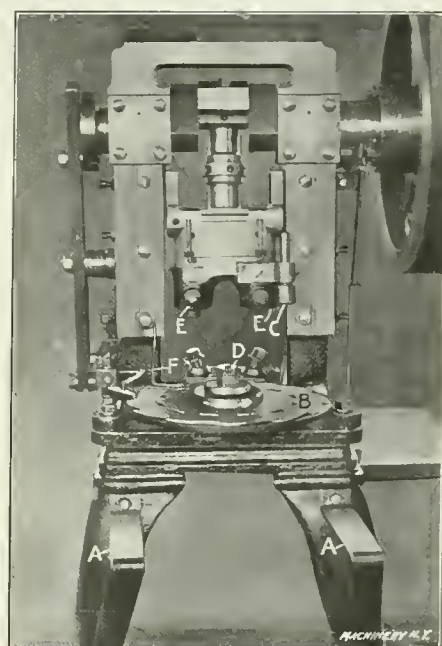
Crimping Machine for Tightening the Cartridge Case on the Bullet after Loading
